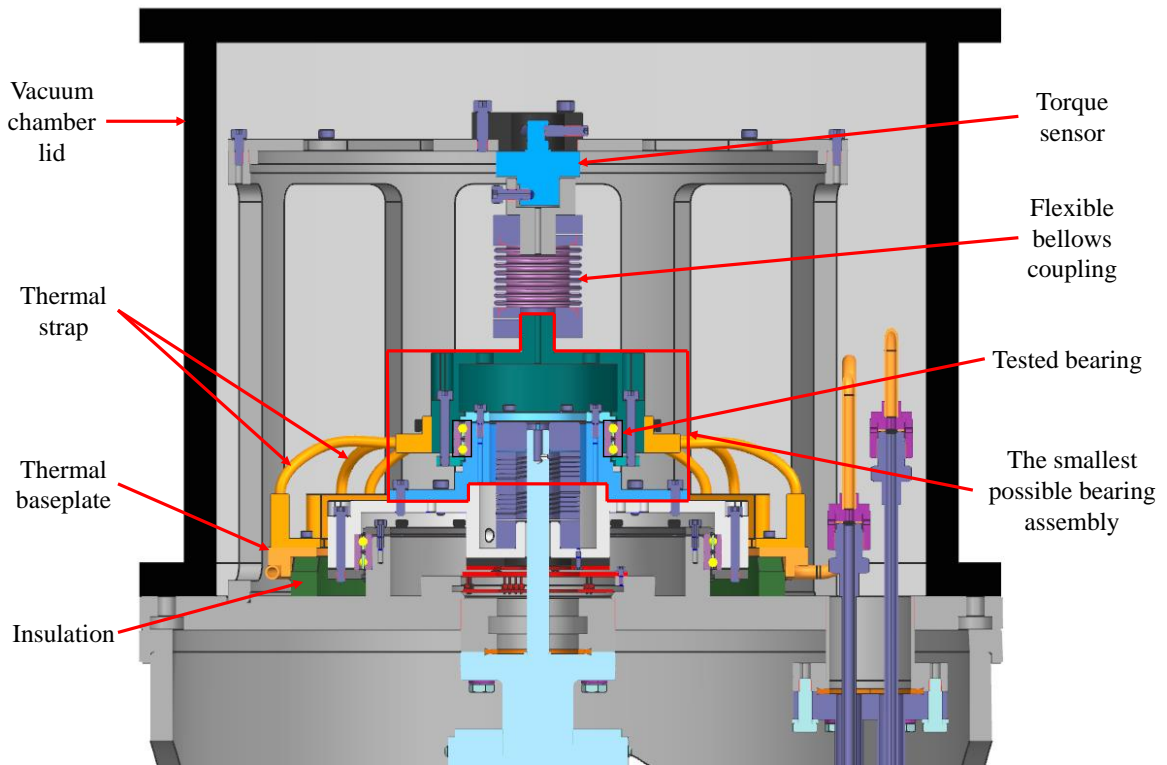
Smallest possible bearing assembly in top assembly for full context.
